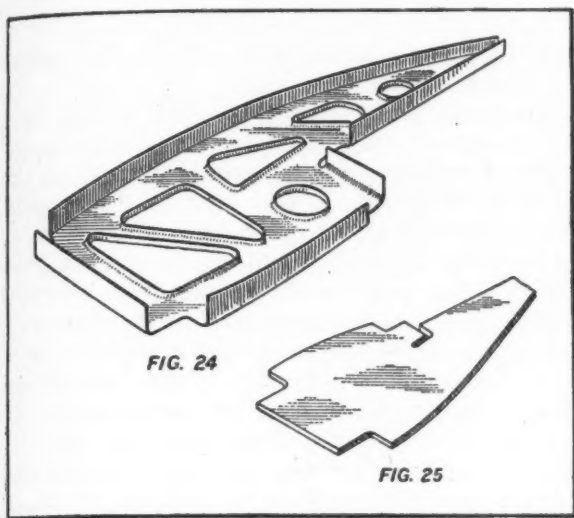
A Typical Airplane Rib Designed for Rubber Pressing. Fig. 25. First-stage Blanking Tool for the Rib Shown in Fig. 24
